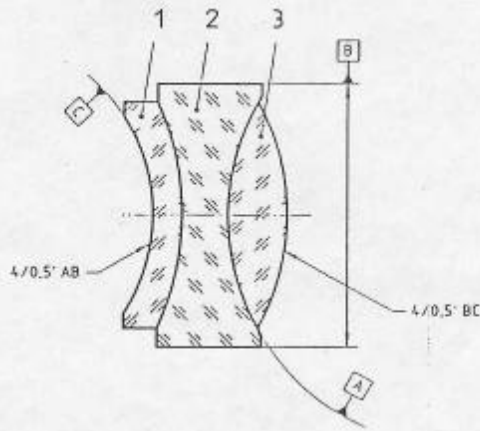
Centring tolerance indication for a compound element referencing two different datum axes
